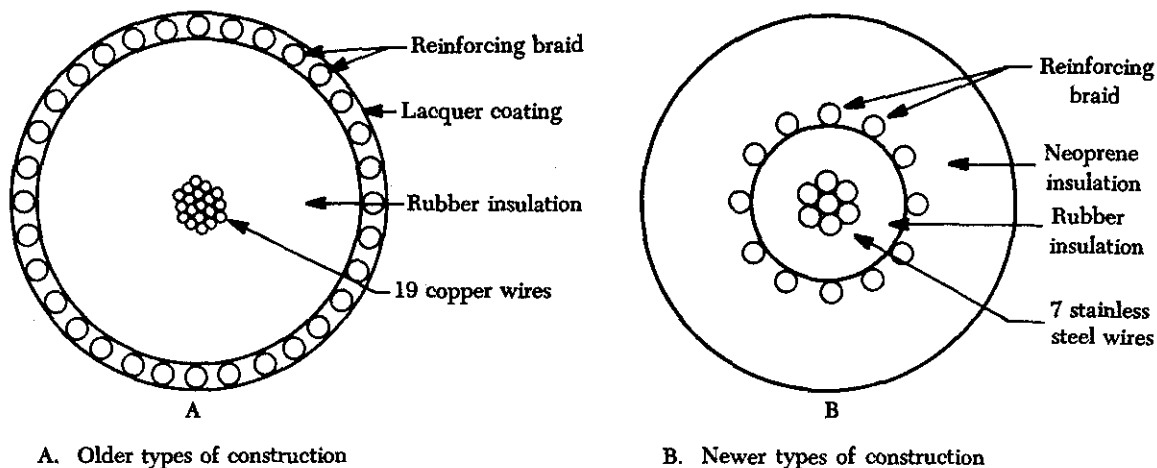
Cross-sectional view of typical high-tension ignition cable.
